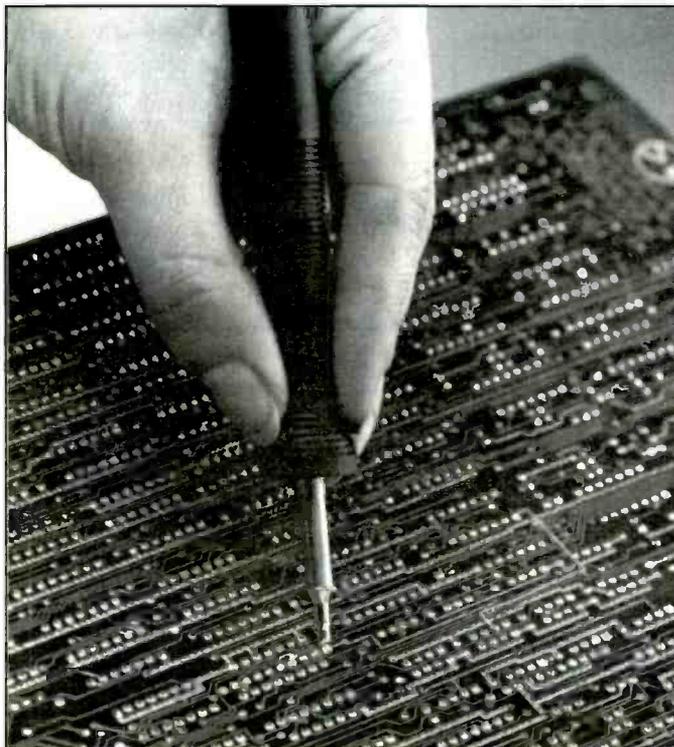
With through-hole components, desoldering, repair and replacement were fairly easy: get a desoldering gun or pencil and the right size tip to remove them, and a good iron to put in a new one.
